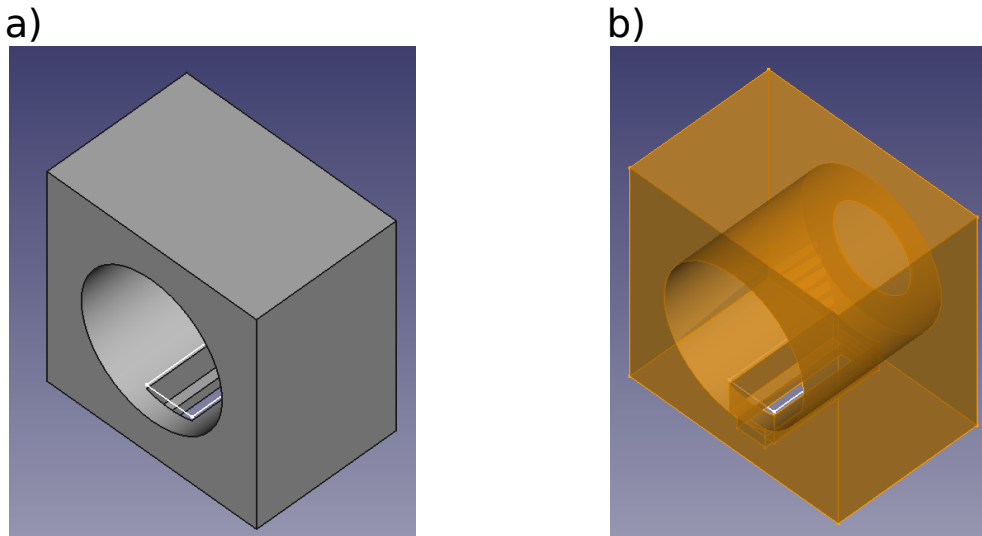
a) View of the filled holder, b) View of the emptied holder
